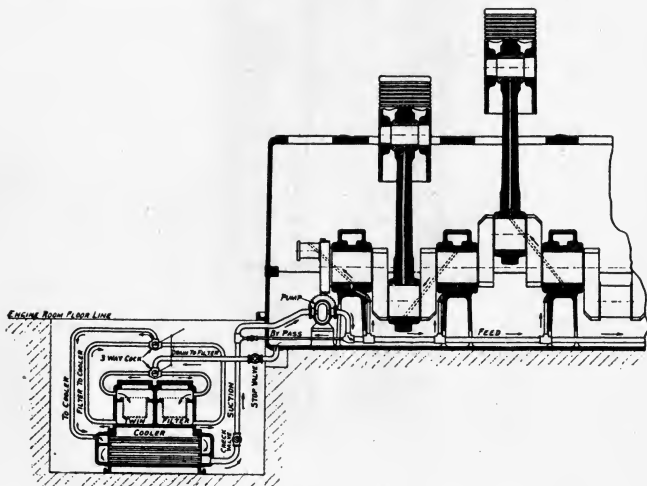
Lubricating System of Busch-Sulzer Bros. Engine.
